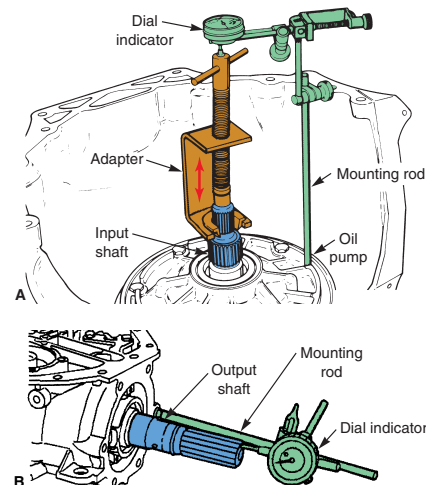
Always check endplay before disassembling the transmission. The service manual will contain the endplay specifications and the procedures for setting up the dial indicators. A—Checking input shaft endplay. B—Checking output shaft endplay. (General Motors)
